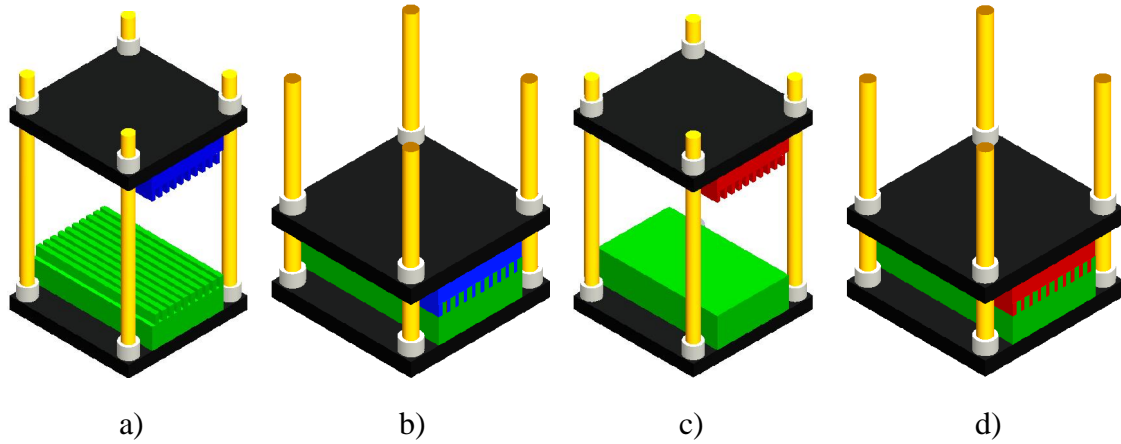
Hot embossing process: a) mold preheating, b) embossing, c) cooling, and d) mold opening.
